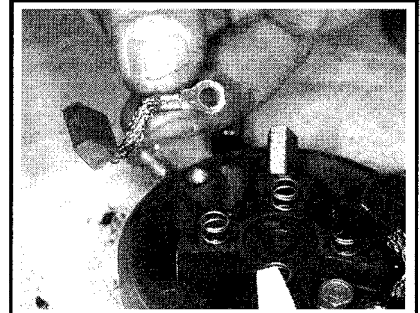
The brush assemblies are normally located in the commutator end cap (except on the largest V6/V8 motors), if removed, note the wire routing
